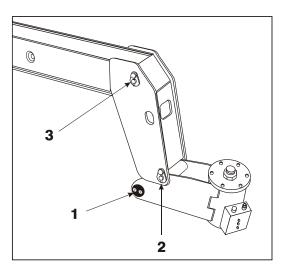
Reassembly of Components-Rotator and Leveling Cylinder
